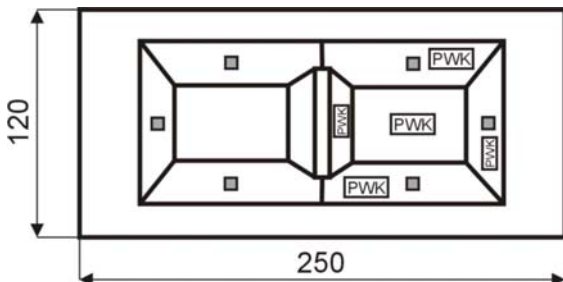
Investigated ingot mould scheme: PWK – area with composite surface layer, ■ - position of thermocouple in distance 45mm from bottom of ingot mould
